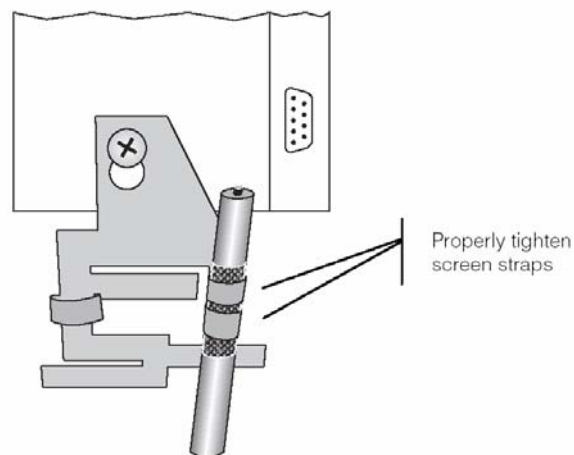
Cable screen connection to mounting parts (signal leads)
